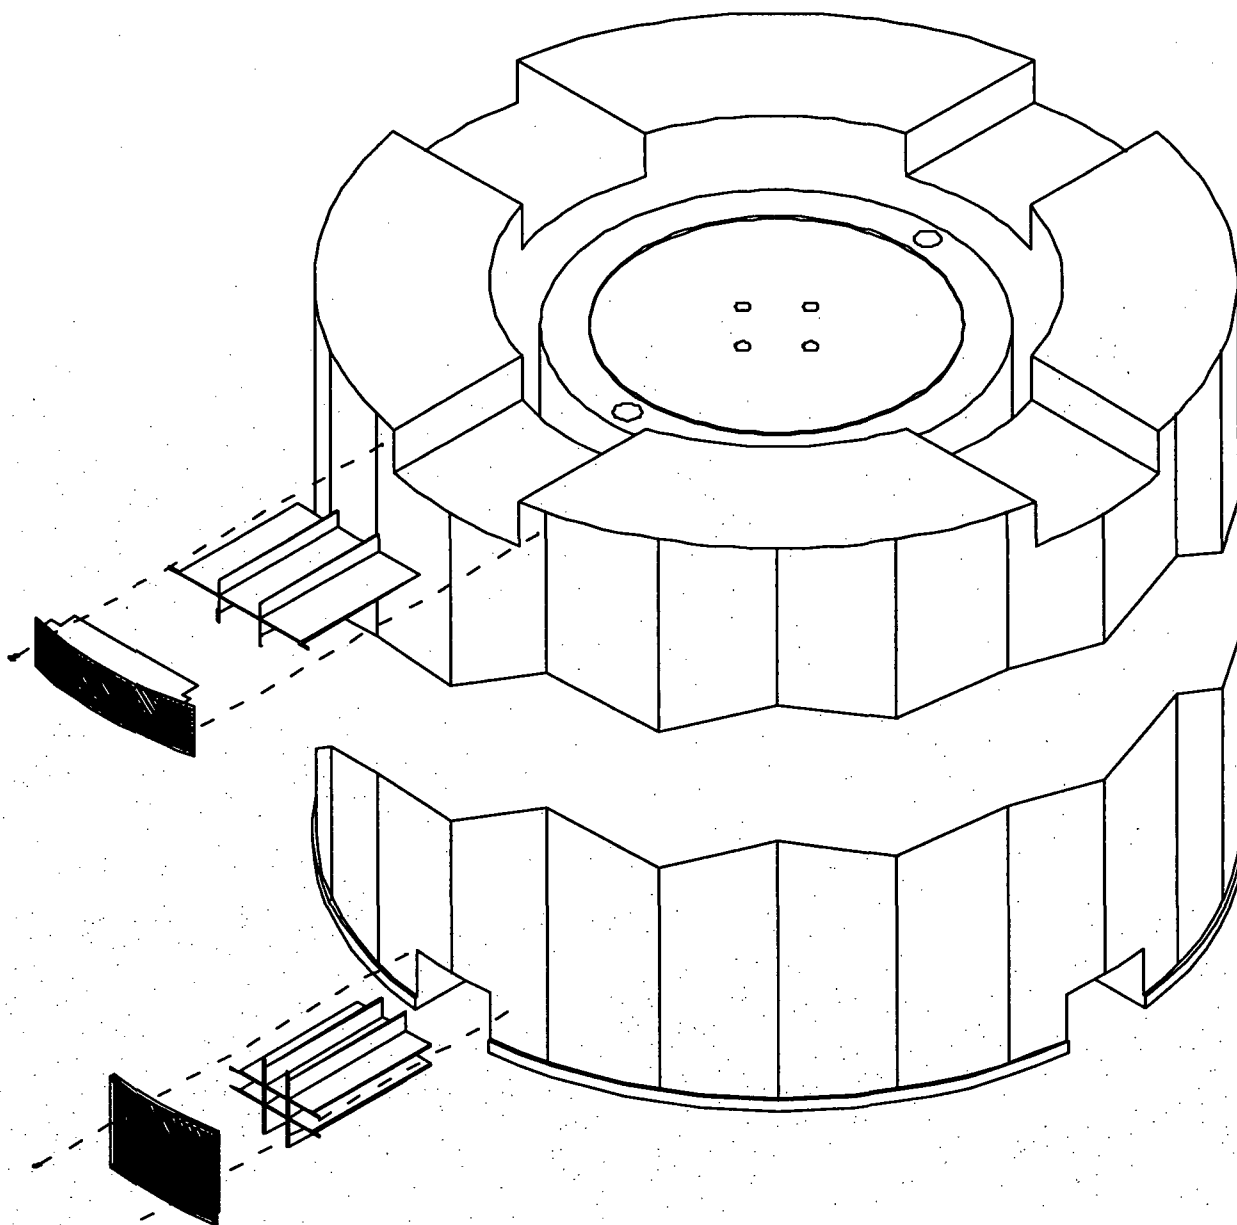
; Typical HI-STORM Vent Screen and Gamma Shield Cross Plate Installation
